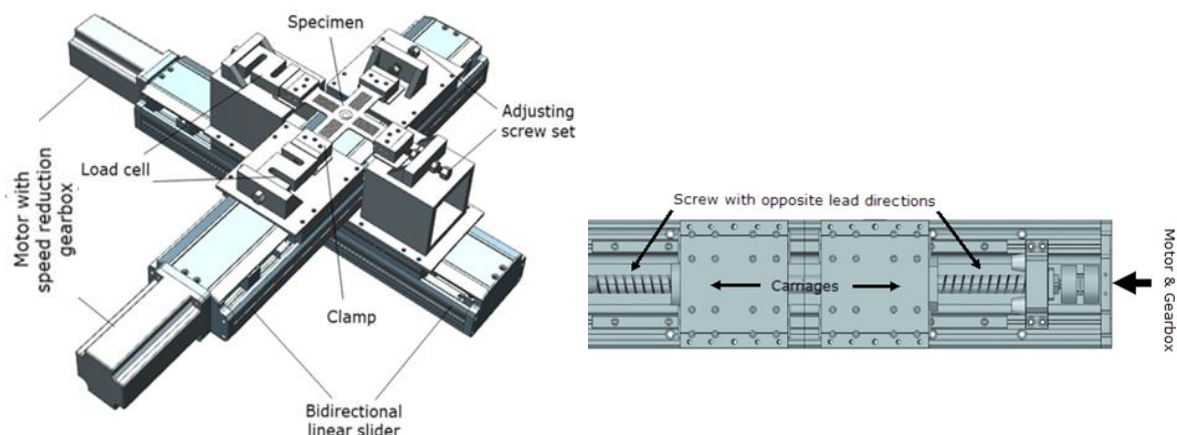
Biaxial tension loading components and bidirectional linear screw sliders.
